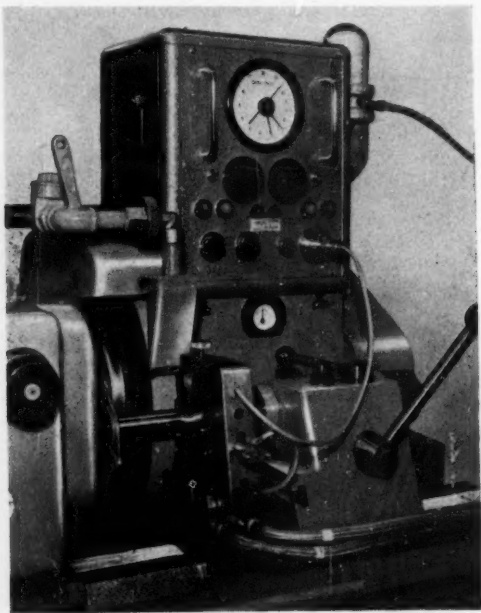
Mercer Mark I Airmatic Automatic Sizing Equipment, Set Up on a Karstens Grinding Machine in the Company's Works
